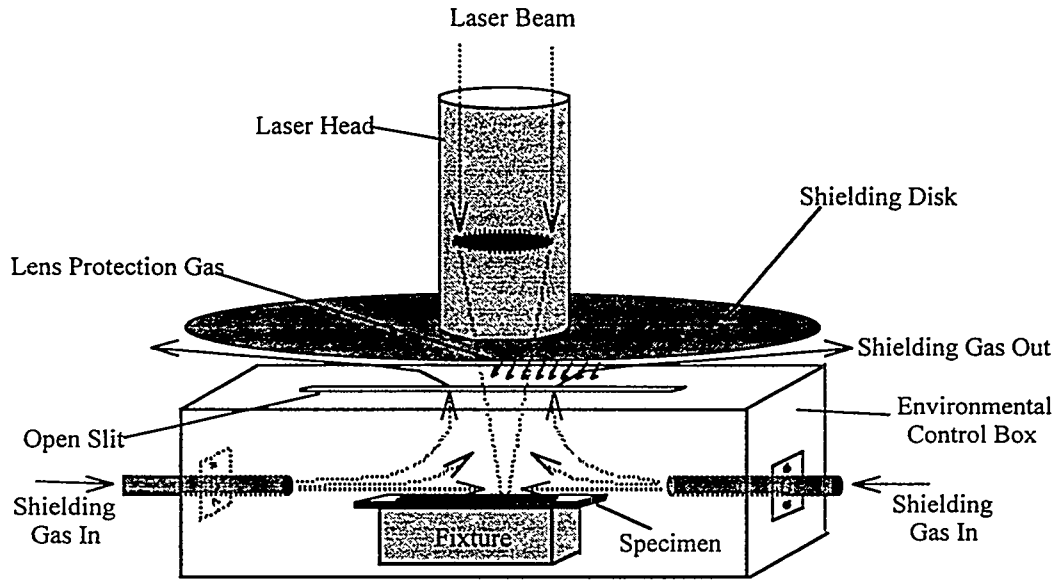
Set-up of the Environmental Control Box (ECB) for the laser welding system.
